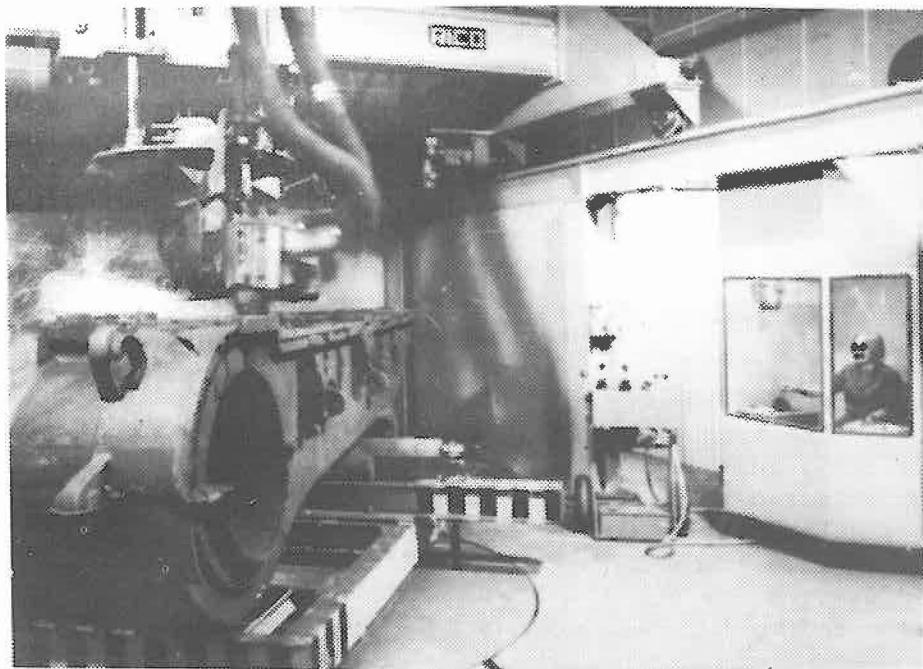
Grinding of flat surfaces with an electro-hydraulically controlled manipulator.
